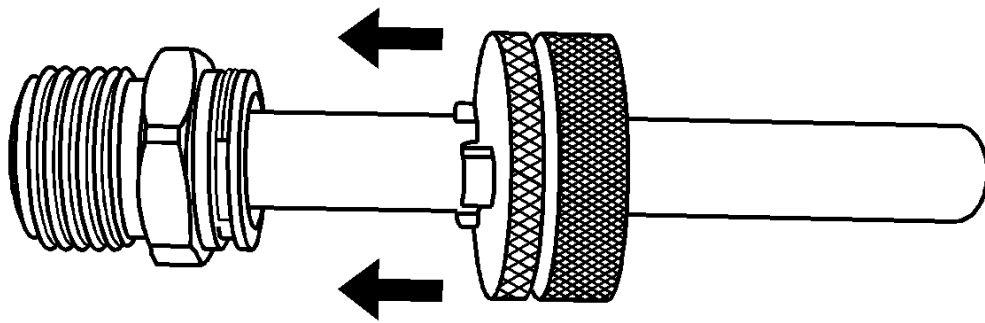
Sliding J 41623-B Toward Generator Cooling Inlet Pipe Fitting
